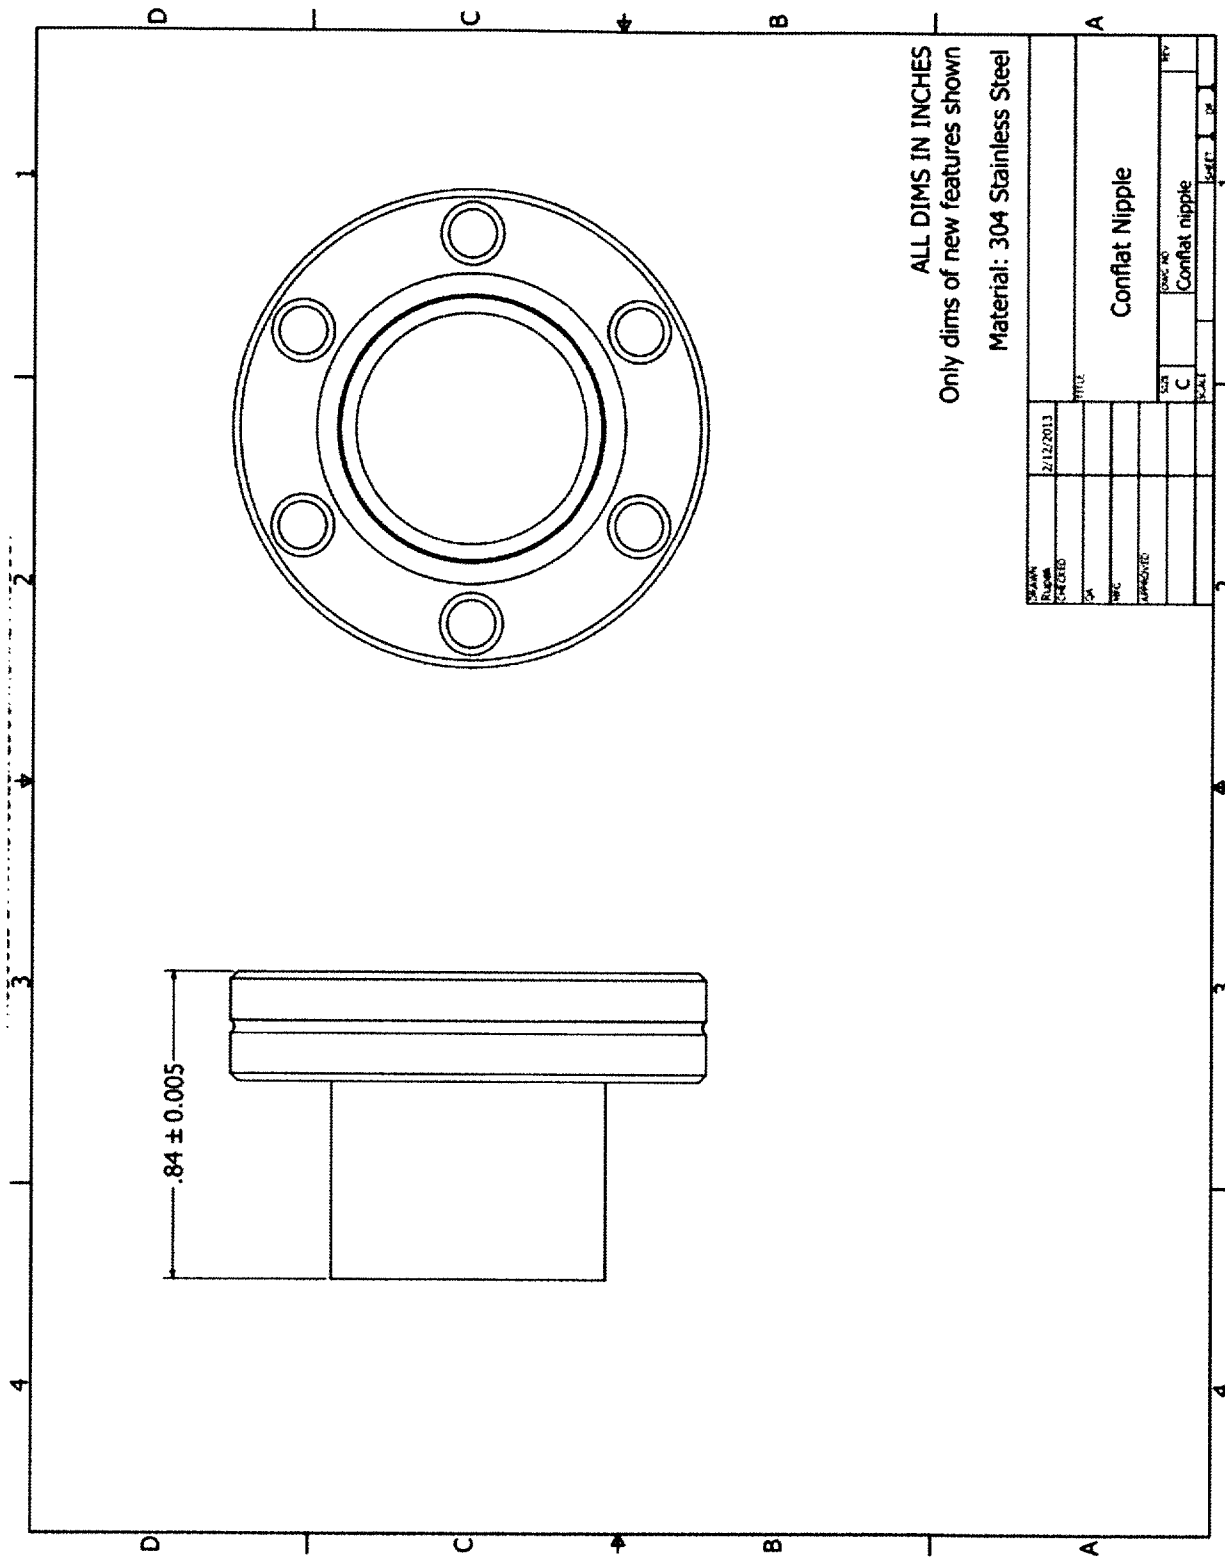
Circular plate welded onto bottom of sample chamber.
